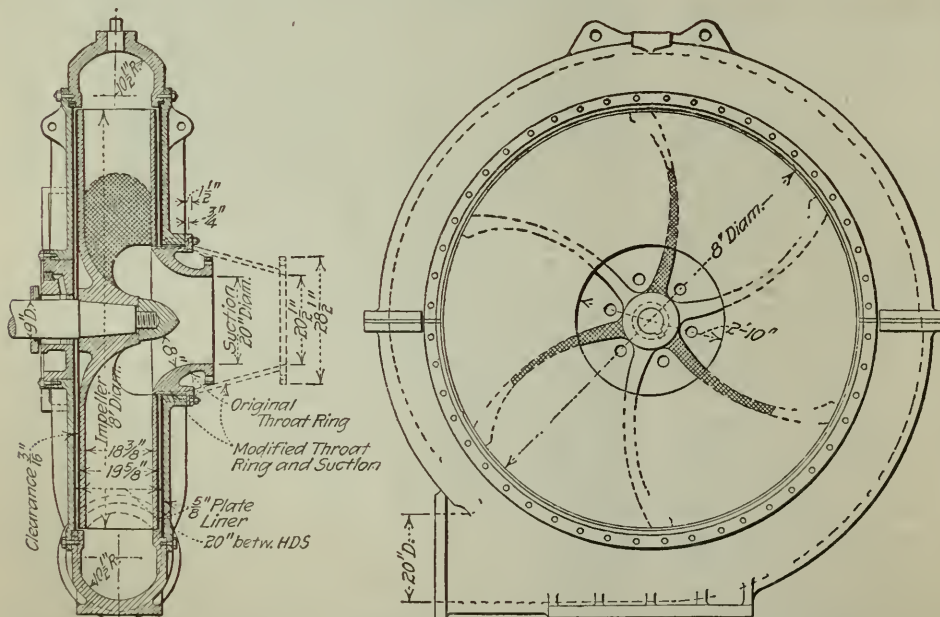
DETAILS OF PUMP ON DREDGE "CAPTAIN HUSTON" SHOWING MODIFIED THROAT AND IMPELLER
